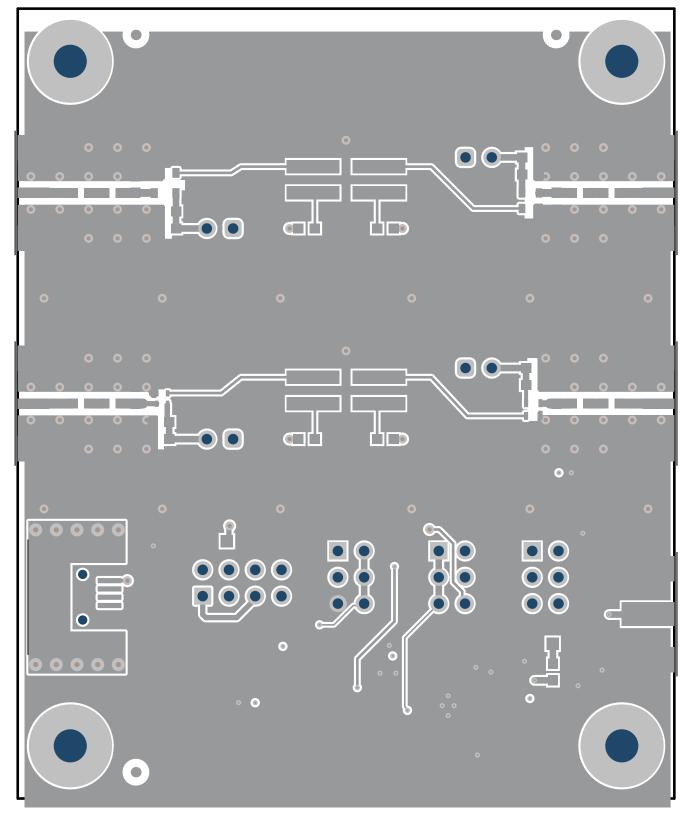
PCB Layout Example From CDC6 EVM - Top Layer
